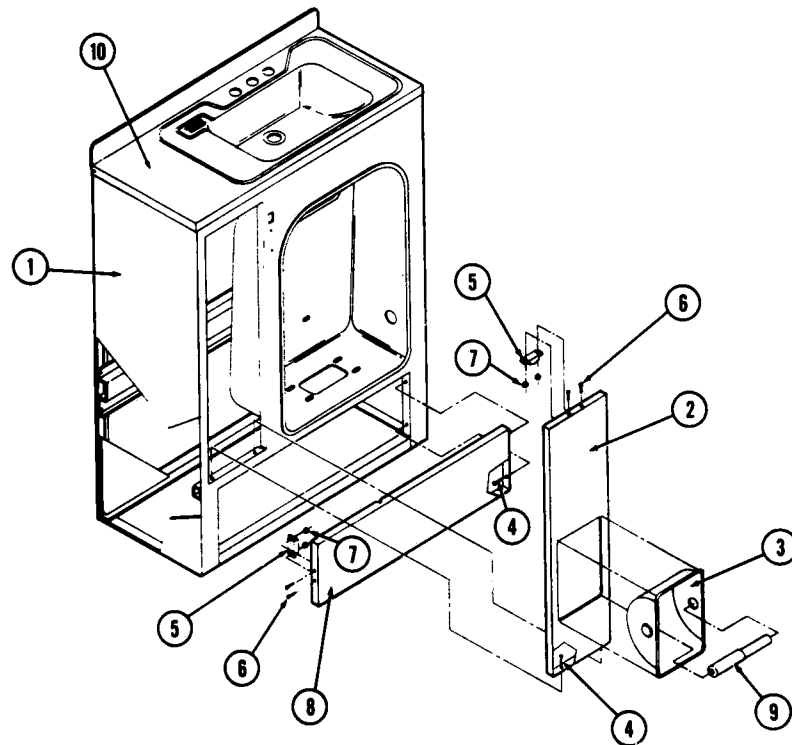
CABINET BODY ASSEMBLY: Model H220 (BA01).
